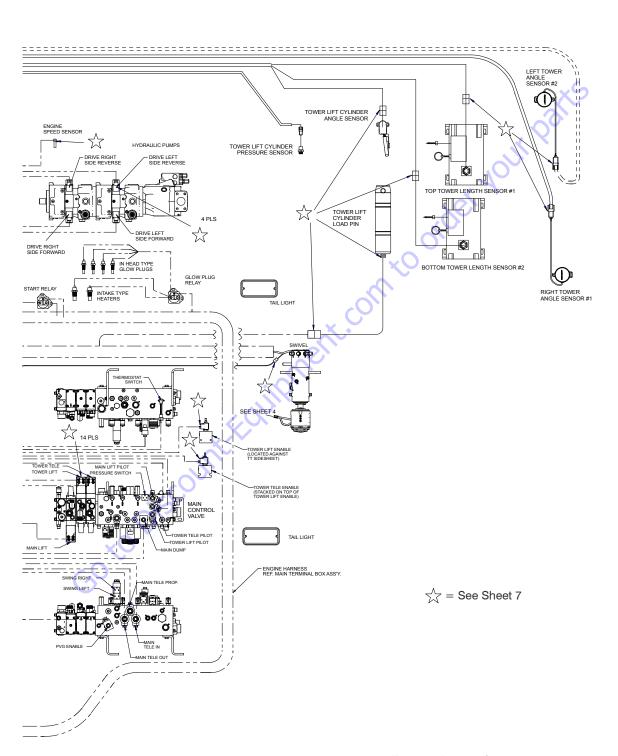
Wiring Harness Installation - Sheet 4 of 7
